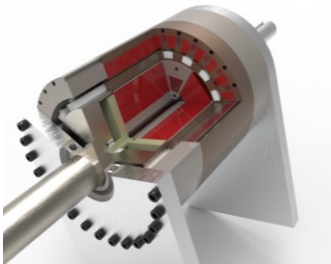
Assembly drawing for the flux concentration magnetic gearbox with laminated rotor parts.
